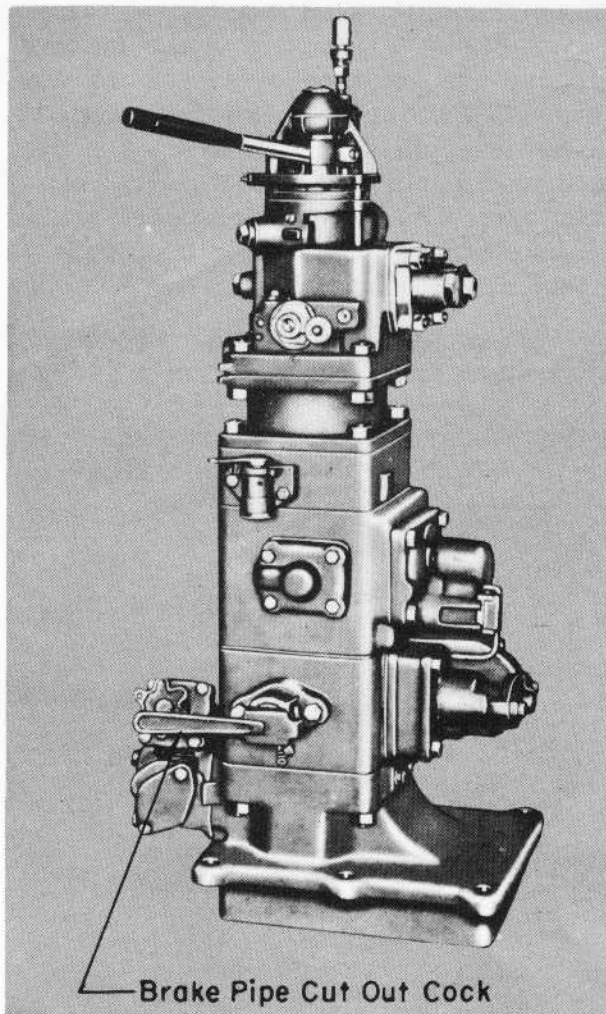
Independent And Automatic Brake Valve Stand-24RL
